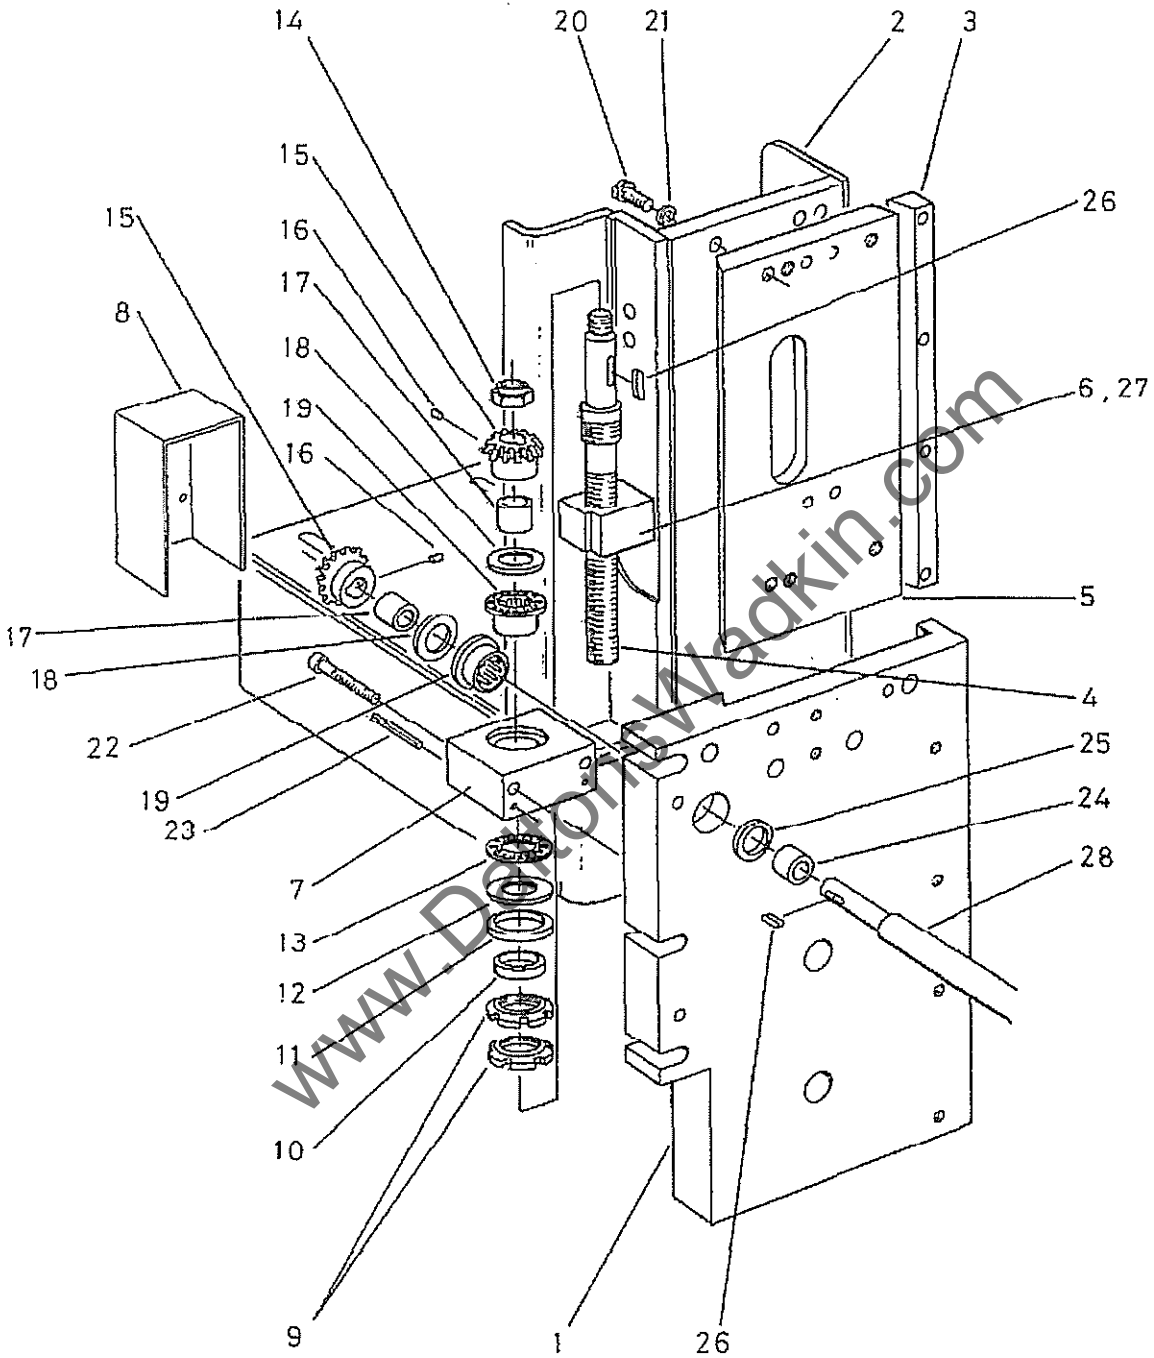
MOTOR RISE AND FALL FOR SIDE HEADS
